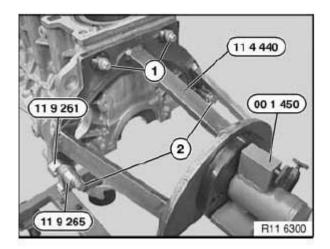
Identifying Special Tool (11 9 261), (11 9 265), (11 4 440),(00 1 450), Steel Bolts And Aluminium Bolts
